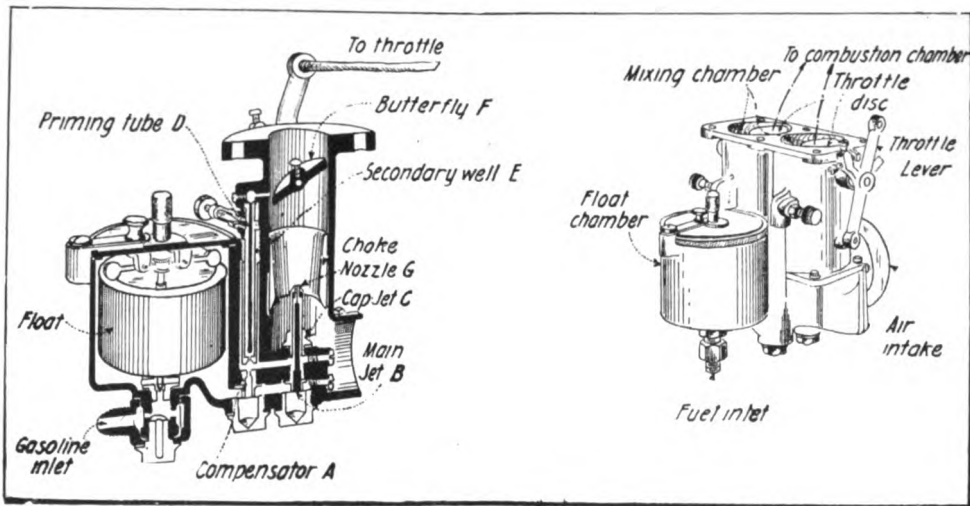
(left)—Sectional view of carburetor showing details of the compound nozzle and compensator
